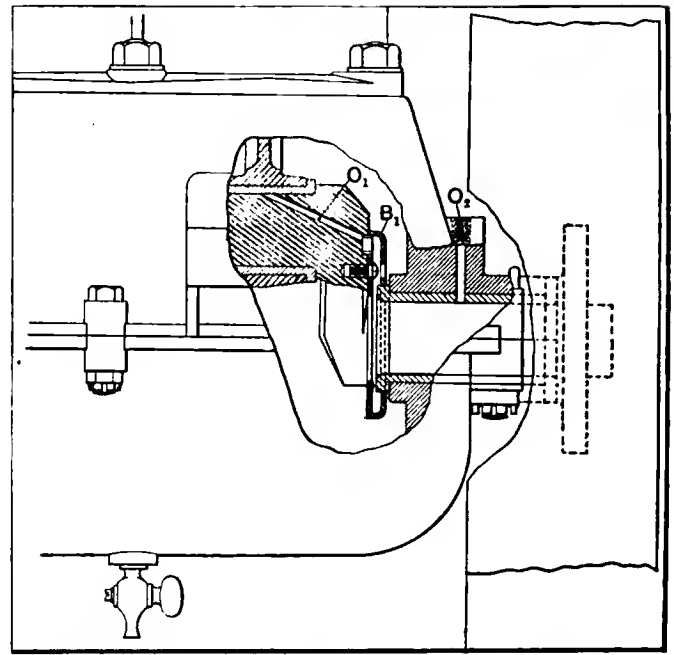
Moon, presenting a detail in the method of lubricating the crankshaft, indicating ingenuity
